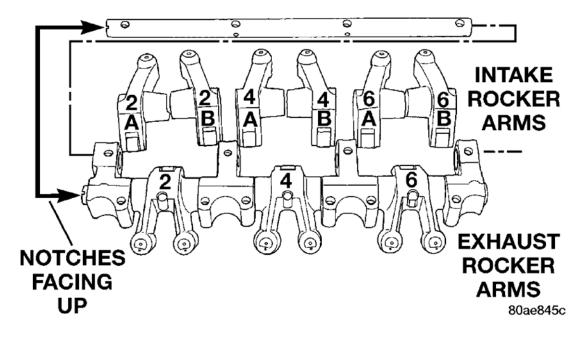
Rocker Arms & Shafts Courtesy of CHRYSLER LLC
